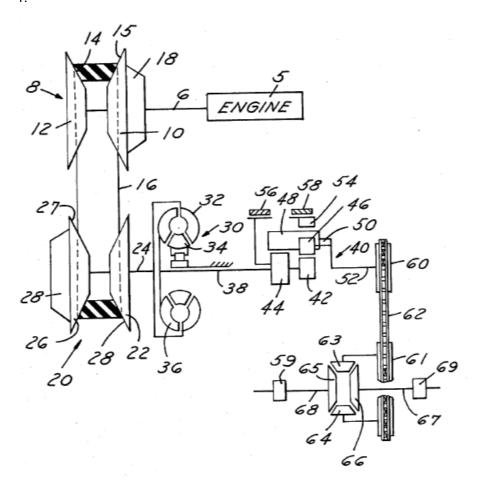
illustrates a combination of gearings comprising a belt-type CVT (8), (16), (20) and a hydrokinetic torque converter (30). The combination of gearings also comprises other mechanical gearings.
